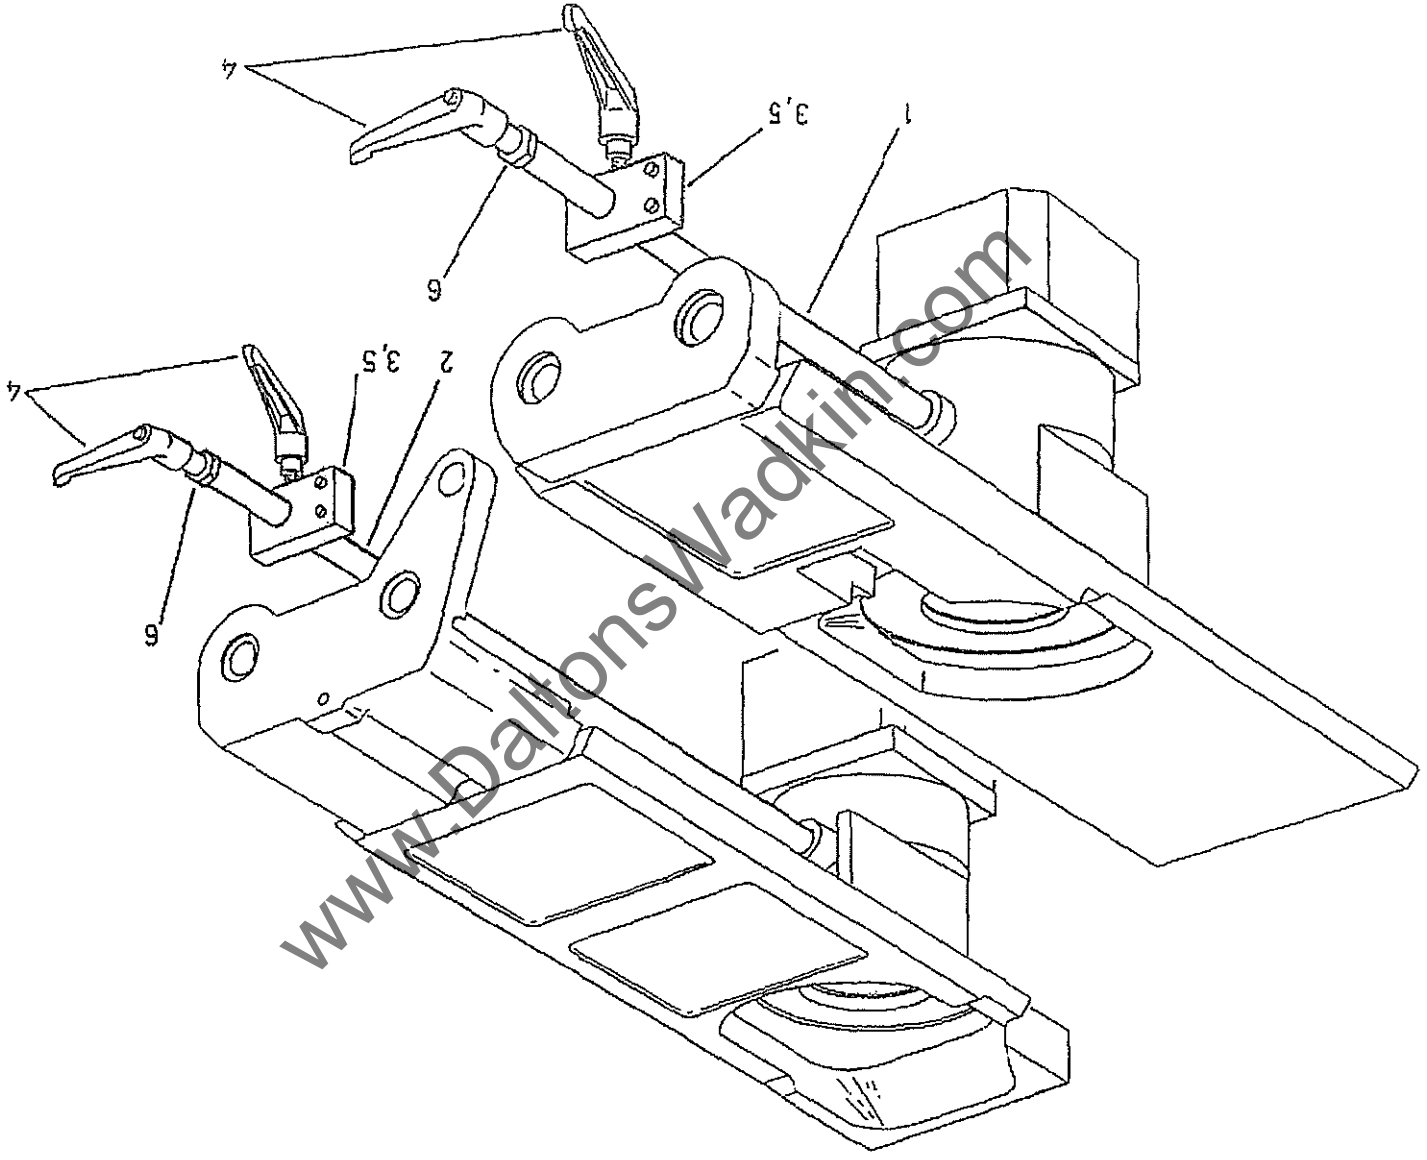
SPINDLE BARREL LOCKS FOR FENCE AND NEAR SIDE HEADS
